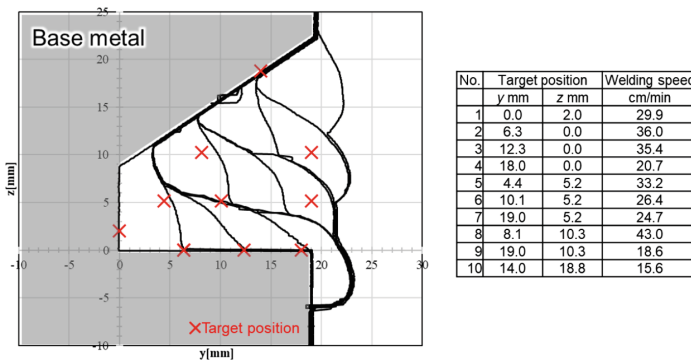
Weld bead shape in experimental result and welding condition (19 mm, gap 9 mm).
